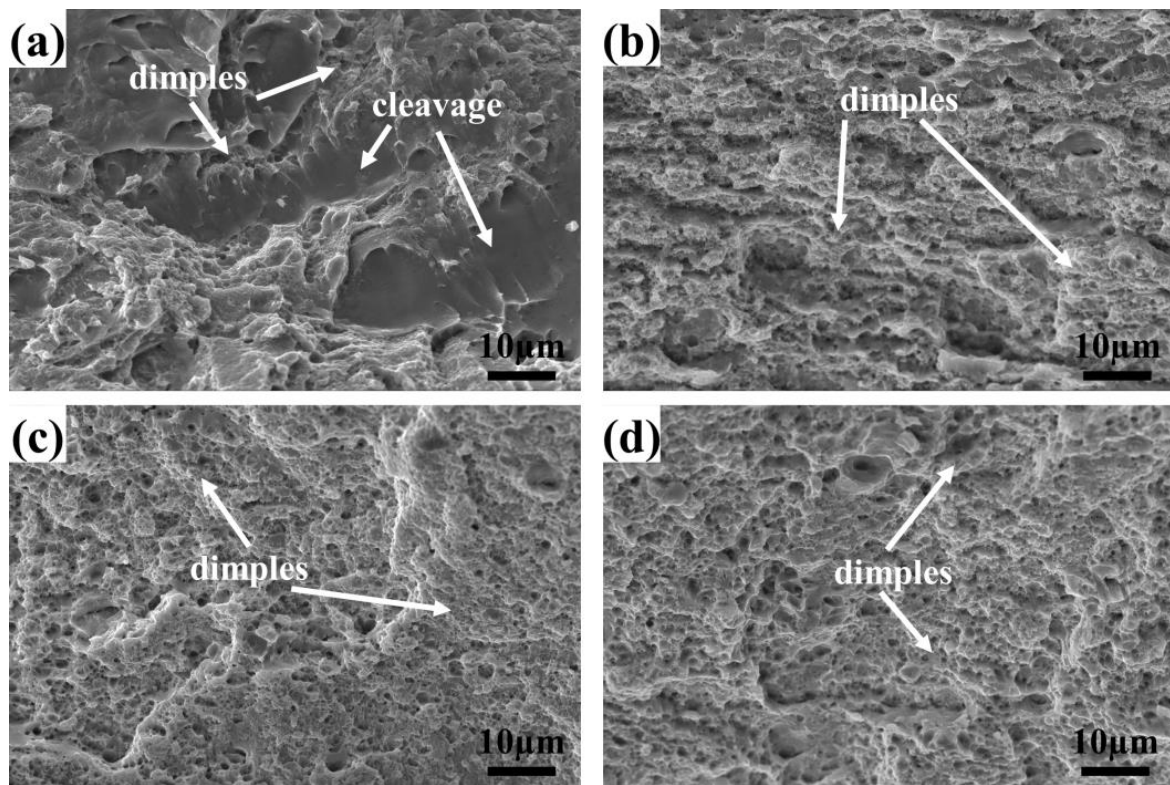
Specimen fracture surfaces: (a) as-built, (b) HT-5, (c) HT-30, and (d) HT-120.
